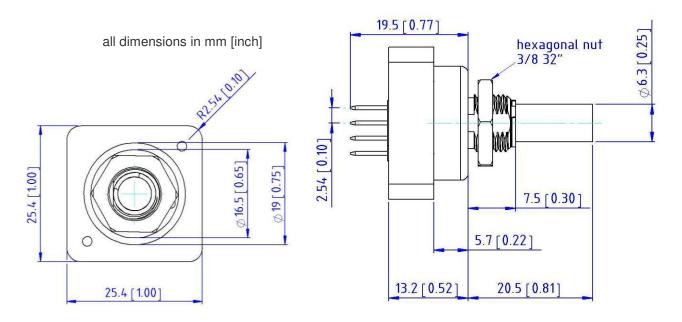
Dimensions of the ED-19-SB-XXXX-X-X (top and side view)
